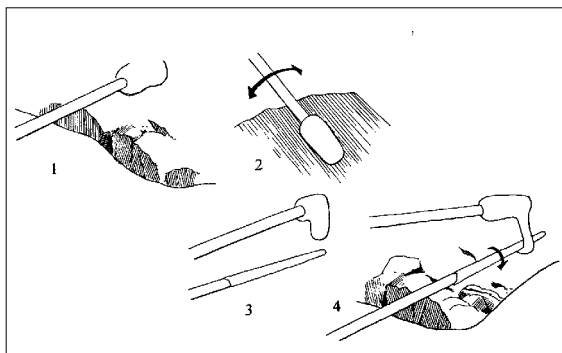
Winding method of glass bead manufactory (by T. Gam): gather on a punty (1), rolling of a gather (2), punty with a gather and rod (3), winding of a bead (4).
